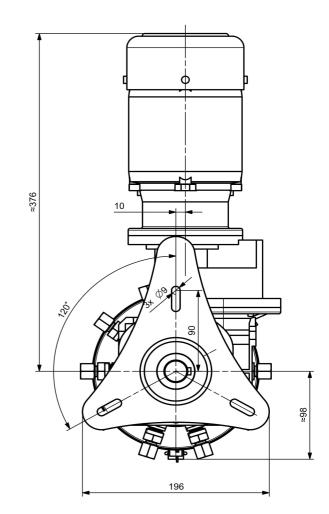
Grease and oil lubrication pump with drive and additional reduction gear of MPS 10-C type
